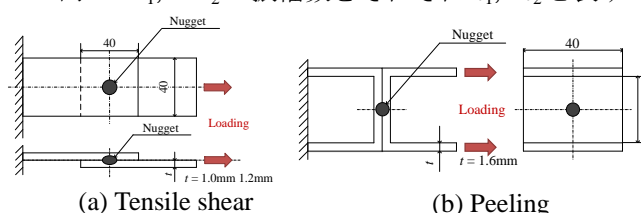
The spot-welded joint for tensile shear and peeling fatigue test
